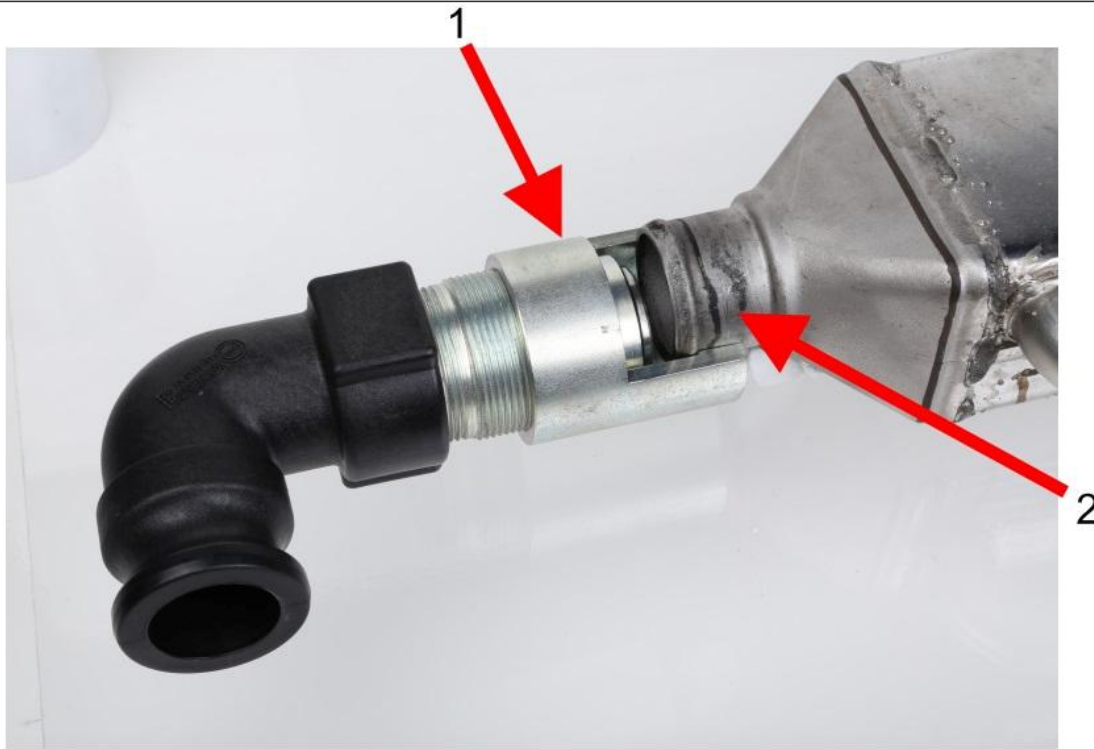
EGR Cooler Outlet Adapter (12-856-07-01) Installation
